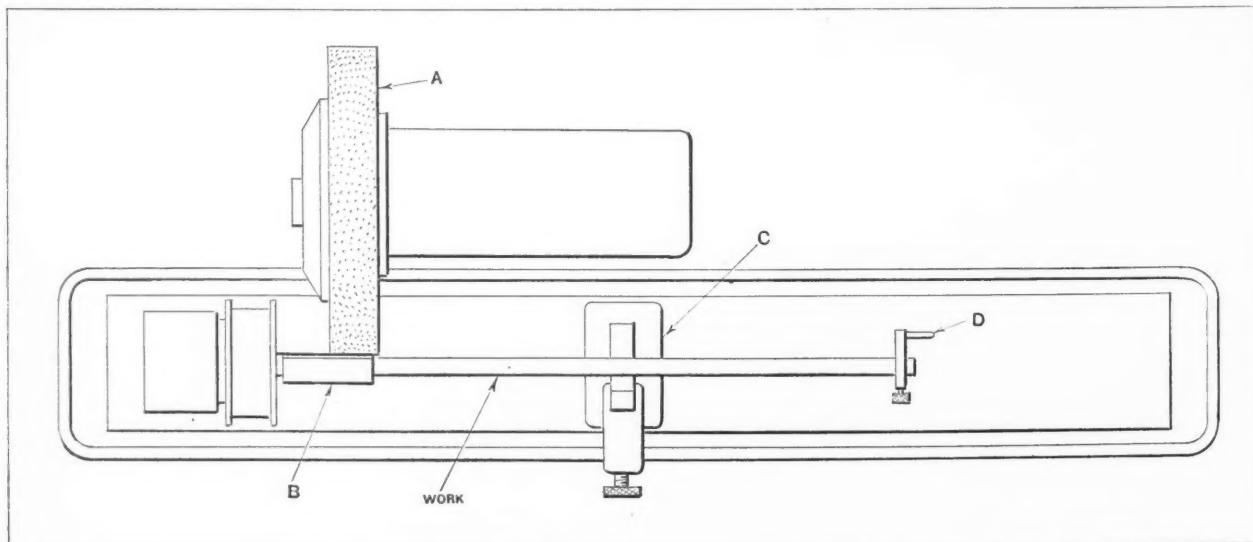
Grinding Machine Equipped with Attachments Shown in Fig. 1
